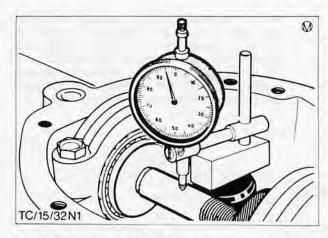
Indicator reading 95 – shim under master pinion too thick
